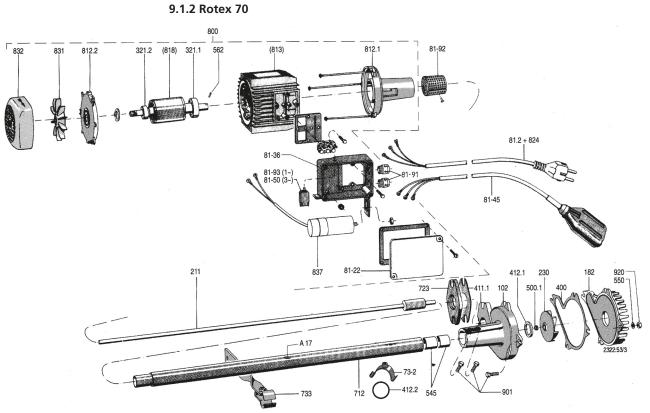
Exploded view - Rotex 70 () = Not available as a separate spare part
